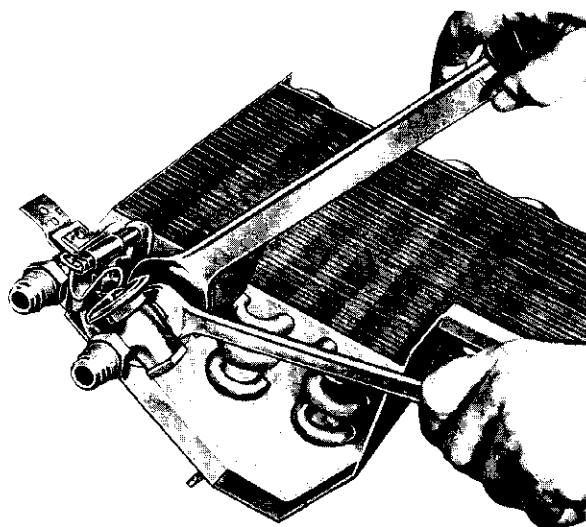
Removing the Expansion Valve (60M-7811)
